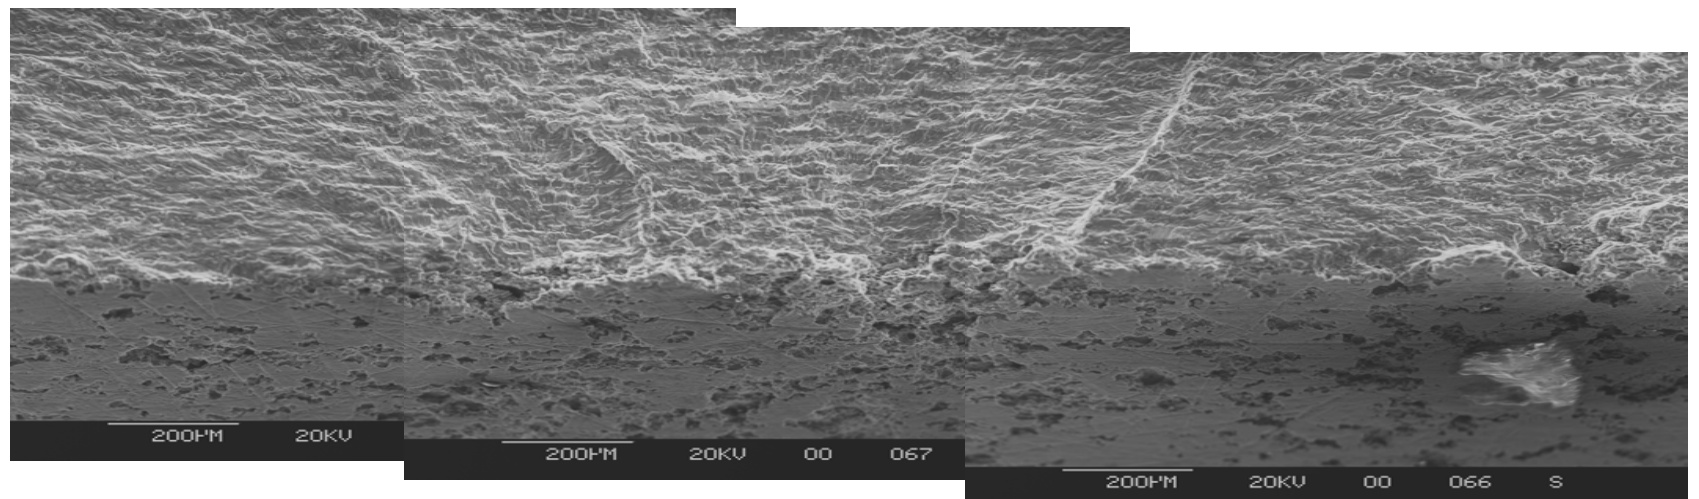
Edge View of Crack Origins on Specimen 6002.
